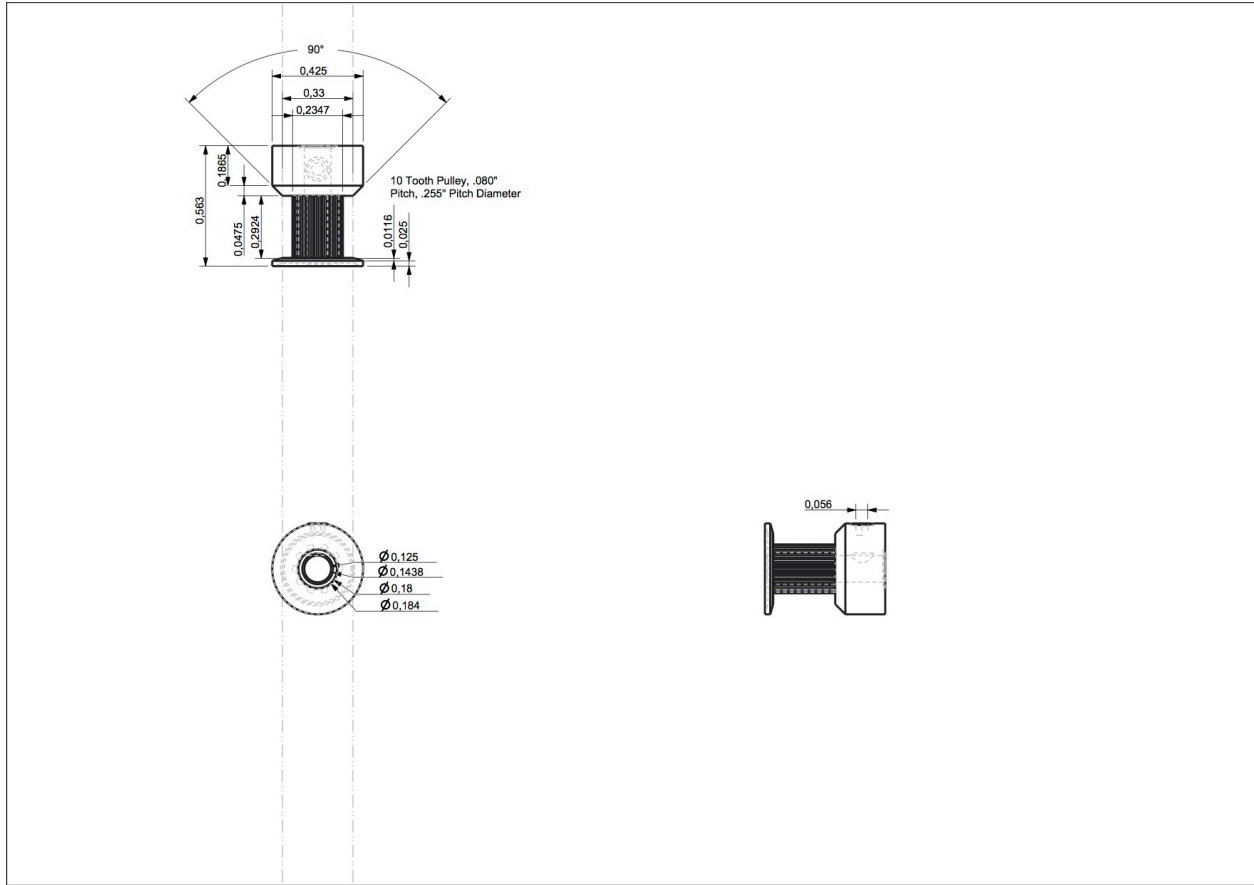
Item 16 – 10 tooth timing belt (SDP-SI Part # A 6N16-010DF1204) (Inches)
